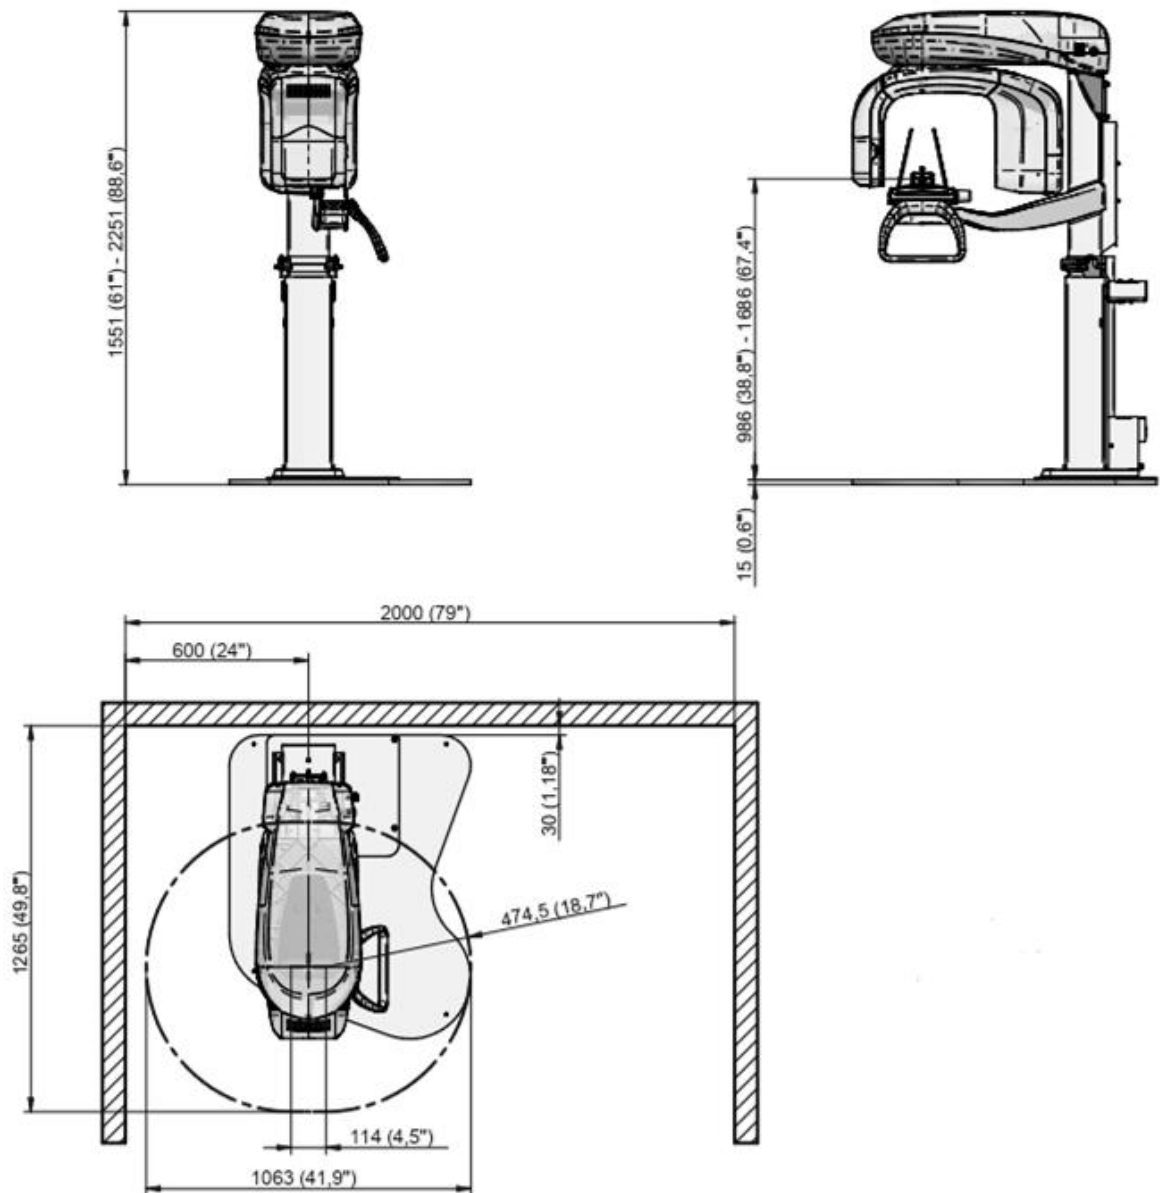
x-mind optima 3D dimensions – Floor self-standing mounted version
